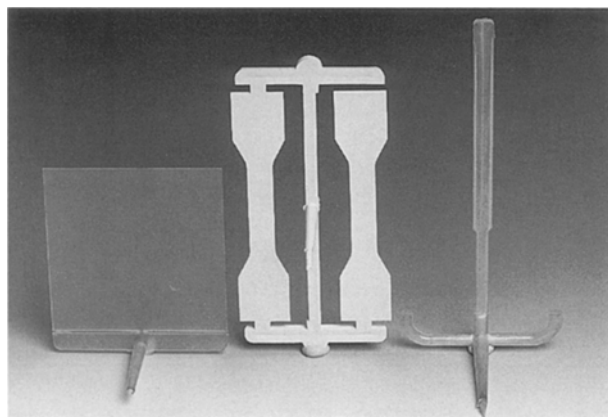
Injection mouldings used: tensile bars, flexural bars and plaque mouldings.
